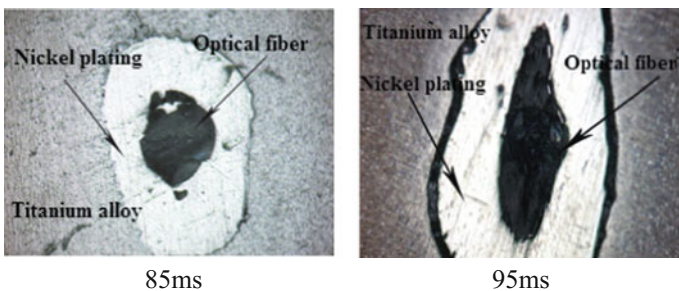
A cross-sectional view of the nickel-plated fiber cut at the edge of the welding head
